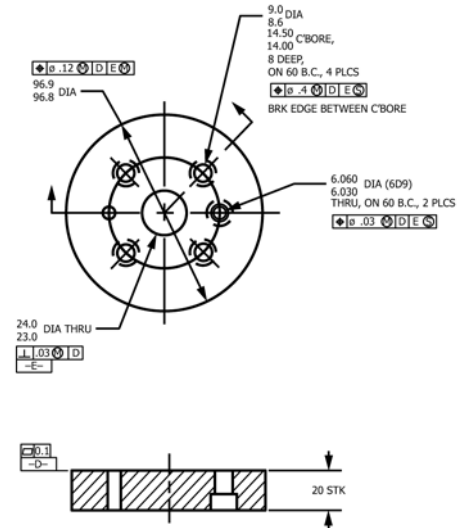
The Insert of the Tensile Fixture in Metric Units
